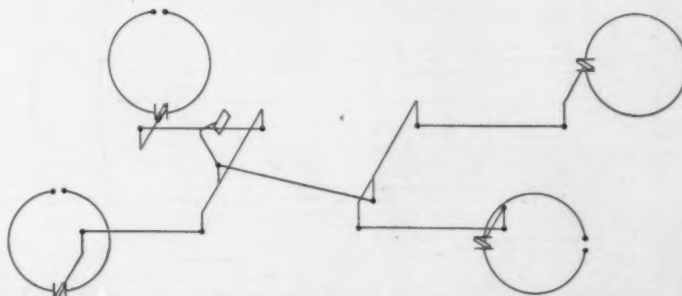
DIAGRAM OF BRAKE LAYOUT OF MODERN PASSENGER-CAR EQUIPPED WITH FOUR-WHEEL BRAKES
